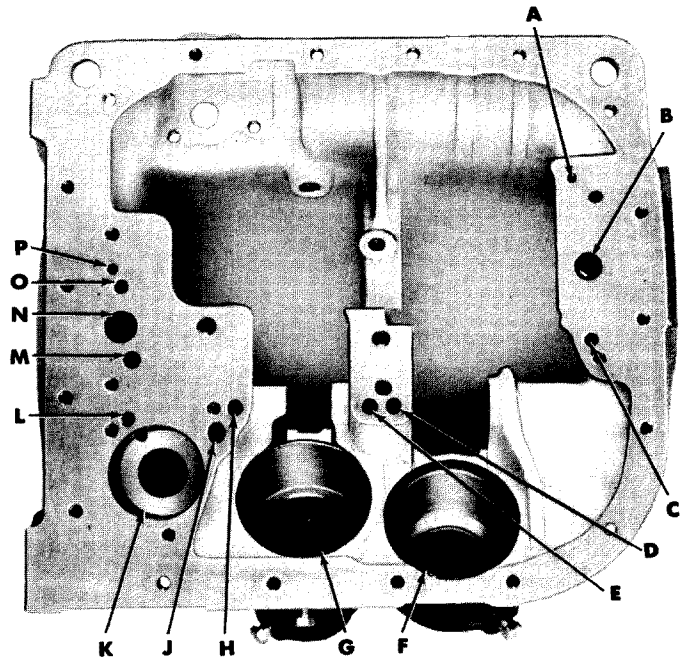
Valve Bodies and Transfer Plate Assembly (Bottom View)
